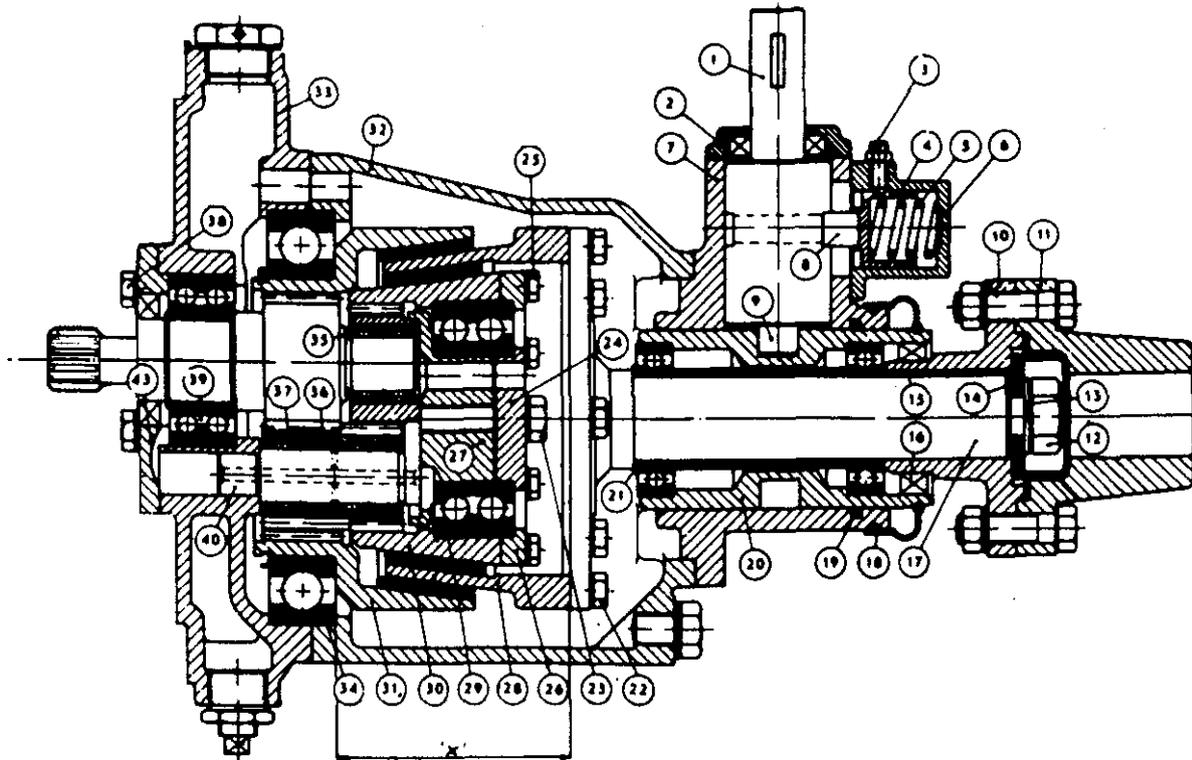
Cross-section of reduction-reverse gear, ratio 1.9 : 1
